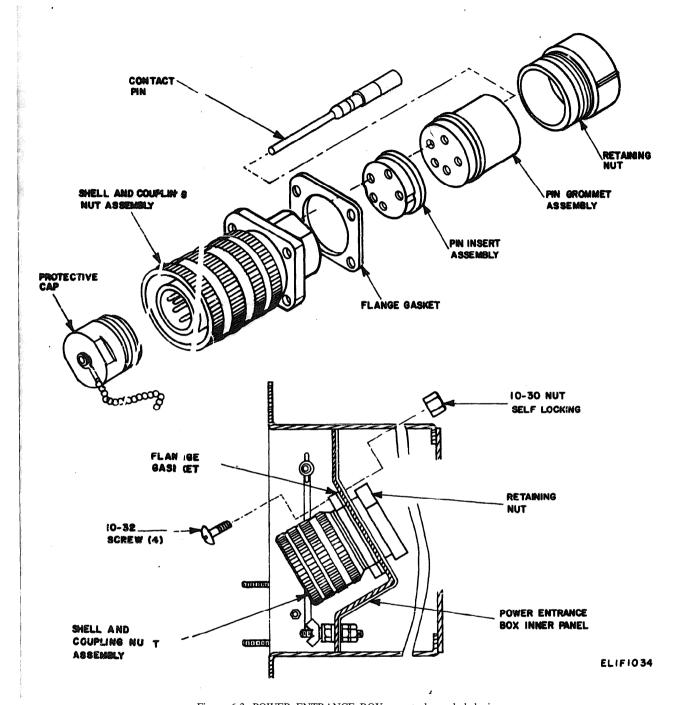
POWER ENTRANCE BOX receptacle exploded view.
